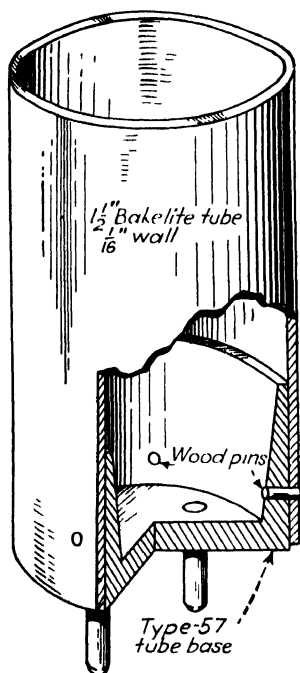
A cutaway view showing how the coil form is fastened to the tube base.
